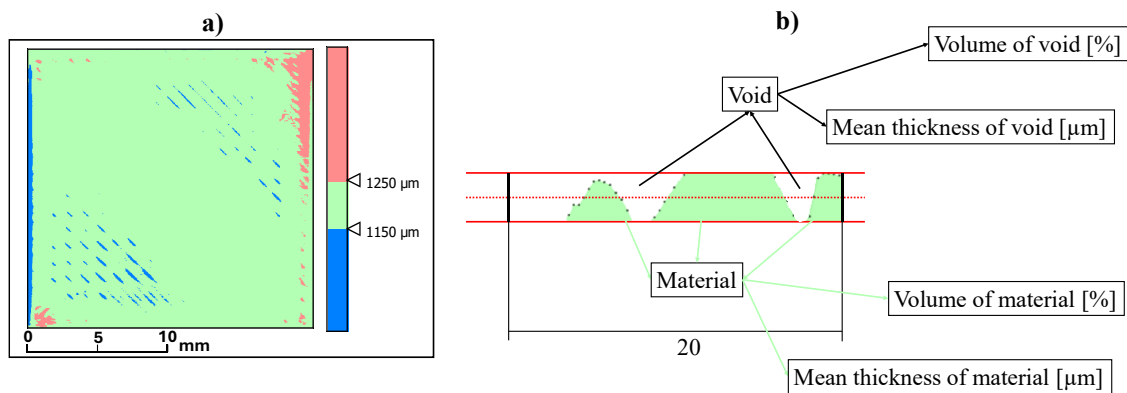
a) Example of PPA output after the thresholding on the layer surface; b) definition of functional analysis parameters that will be used for the layerwise surface monitoring.
